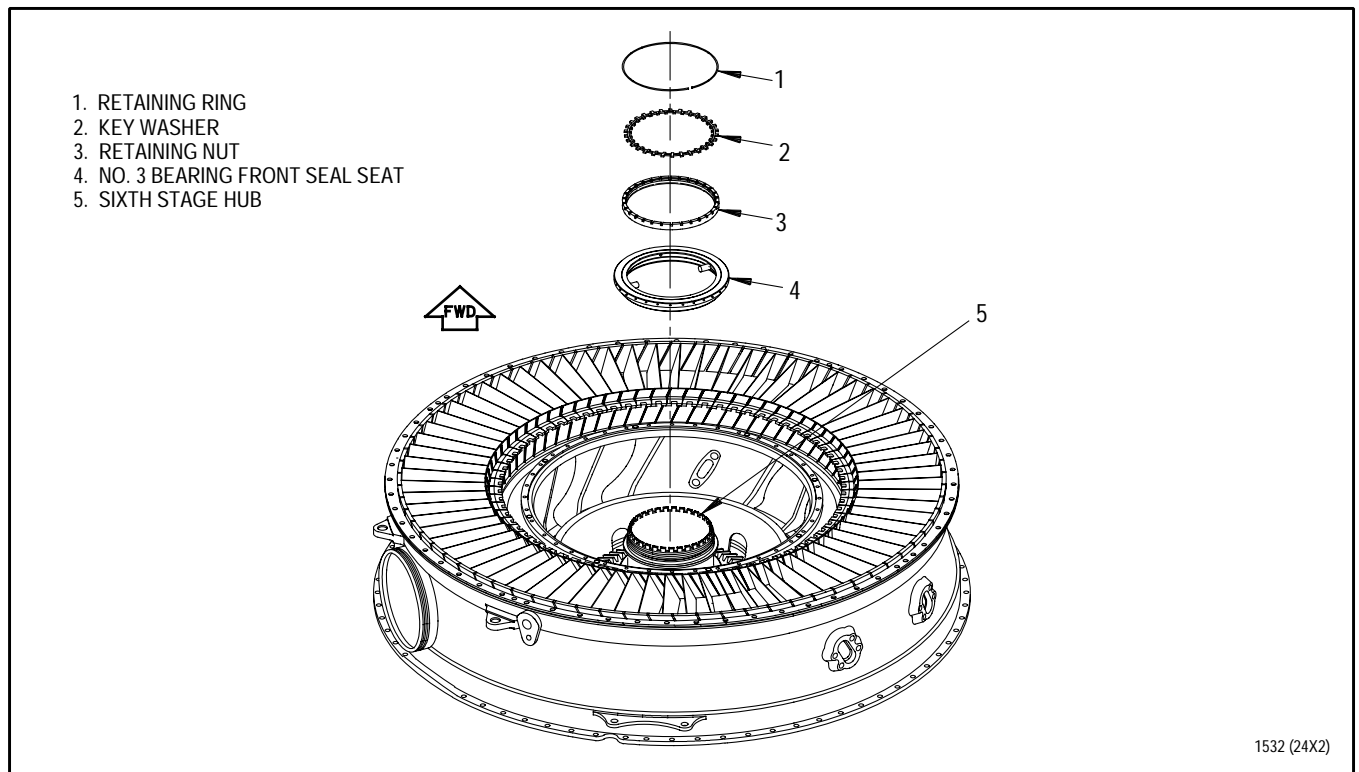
No. 3 Bearing Front Seal Seat - Installation
